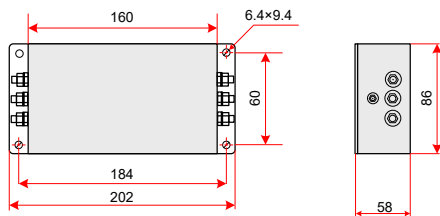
Dimensions of Jianli series filter DL-10EBK5/DL-16EBK5 (unit: mm)
